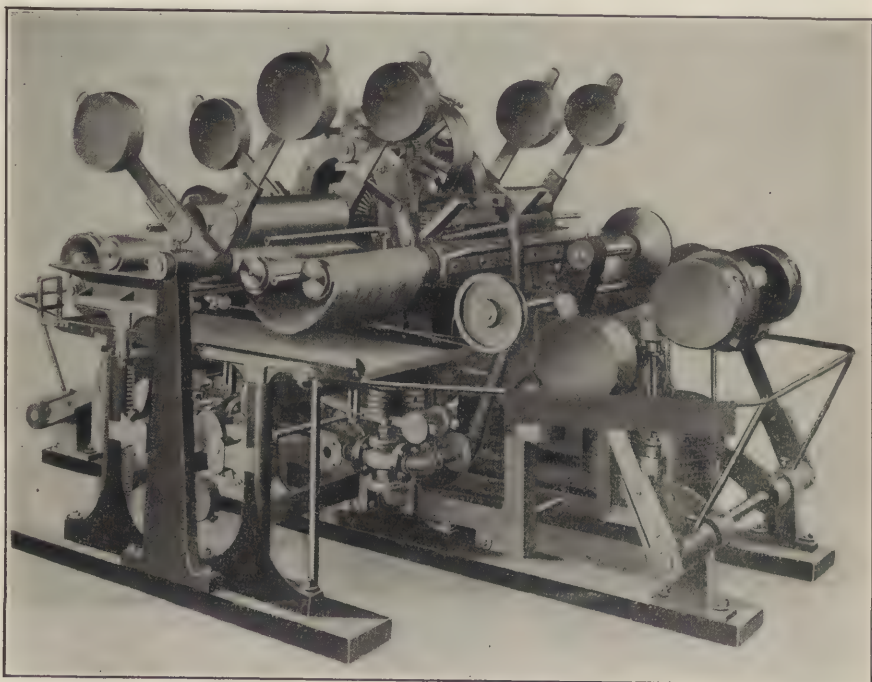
Automatic Skein Mercerising Machine. (Haubold System.)
